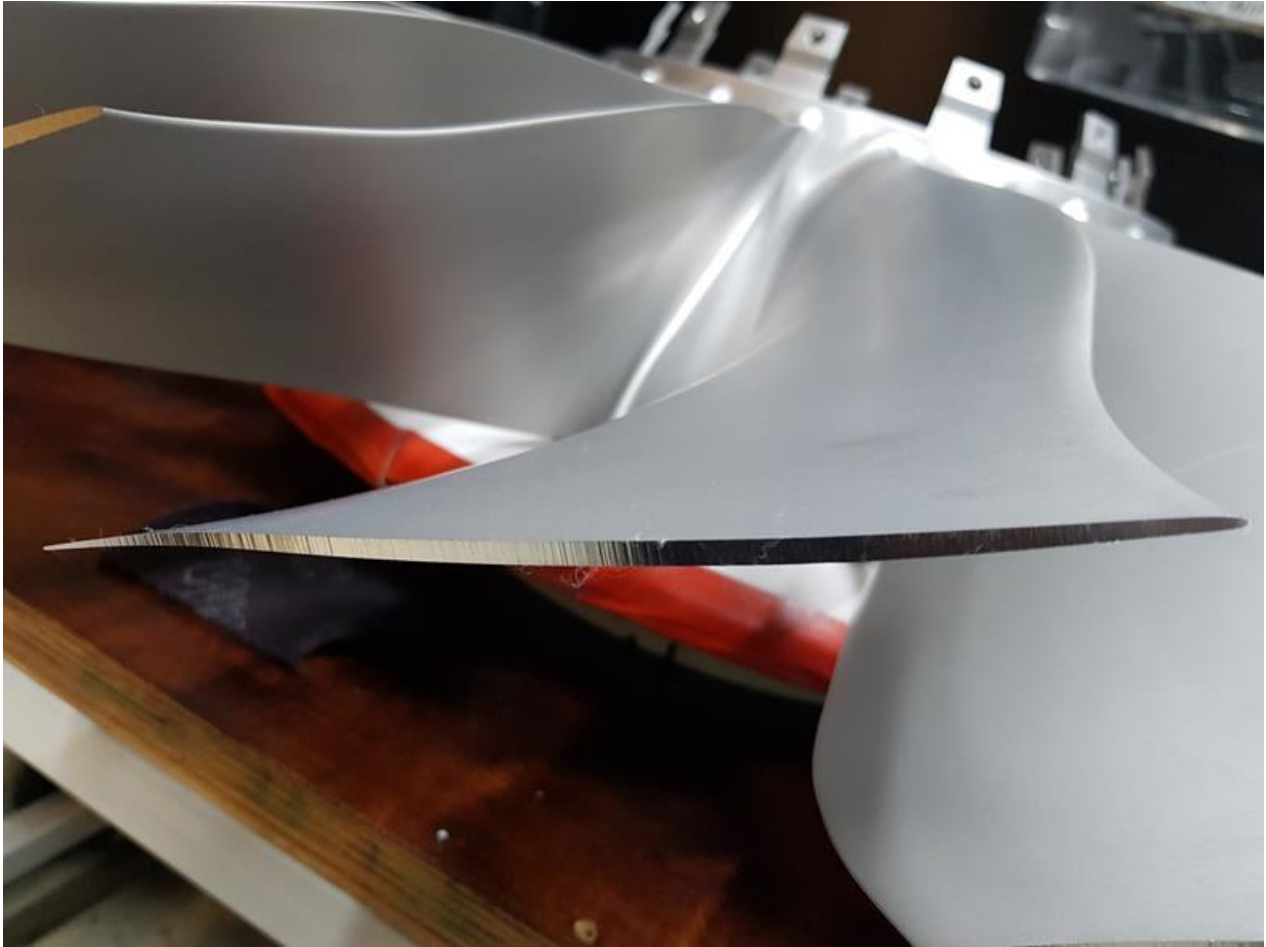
Tip-milled aerofoil – ACCEPTABLE machining marks, surface finish within drawing limits
